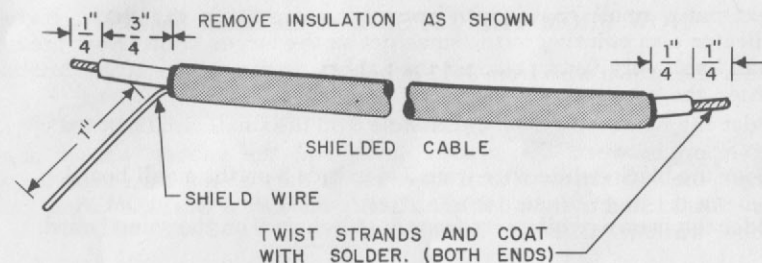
PREPARATION OF SECOND GROUP OF SHIELDED CABLES
